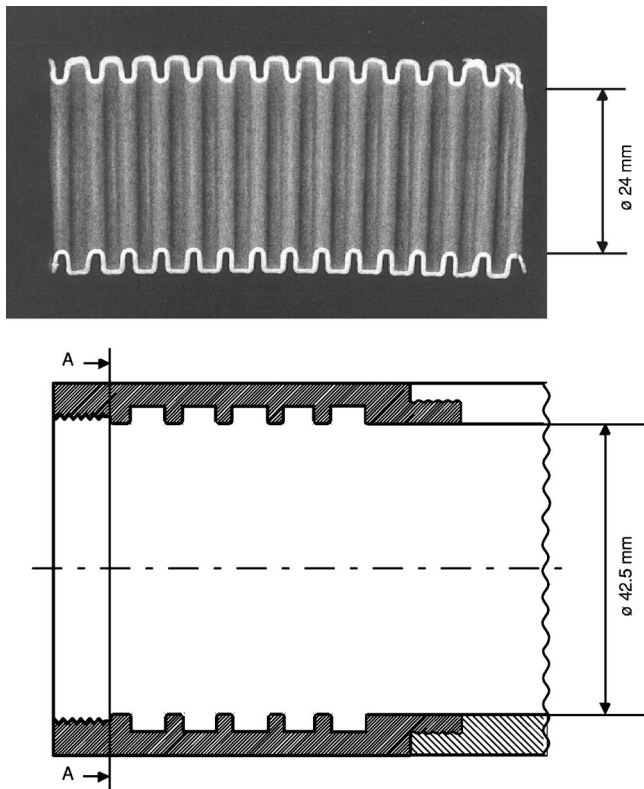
Sections of the two pipe types used. Upper panel: A short section of the corrugated pipe; lower panel: Five cavity section at inflow end of longer smooth pipe.
